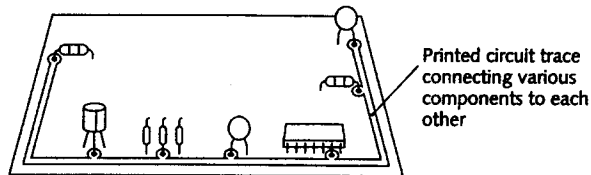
No matter where or to what component lead along a single printed circuit trace you solder a wire, you get the same electrical connection.
